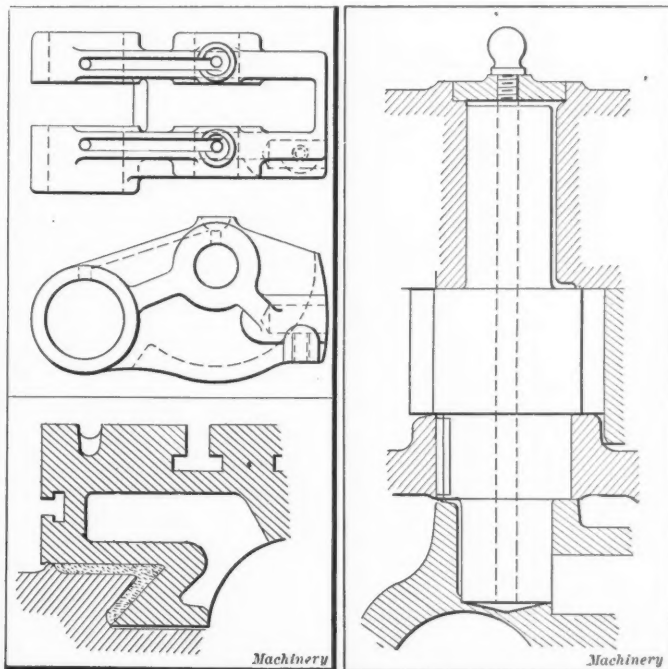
Tumbler Bracket with Long Troughs. Fig. 36. Felt Pad let into Pocket of Milling Machine Slide. Fig. 37. Lubrication of Top and Bottom Journal
